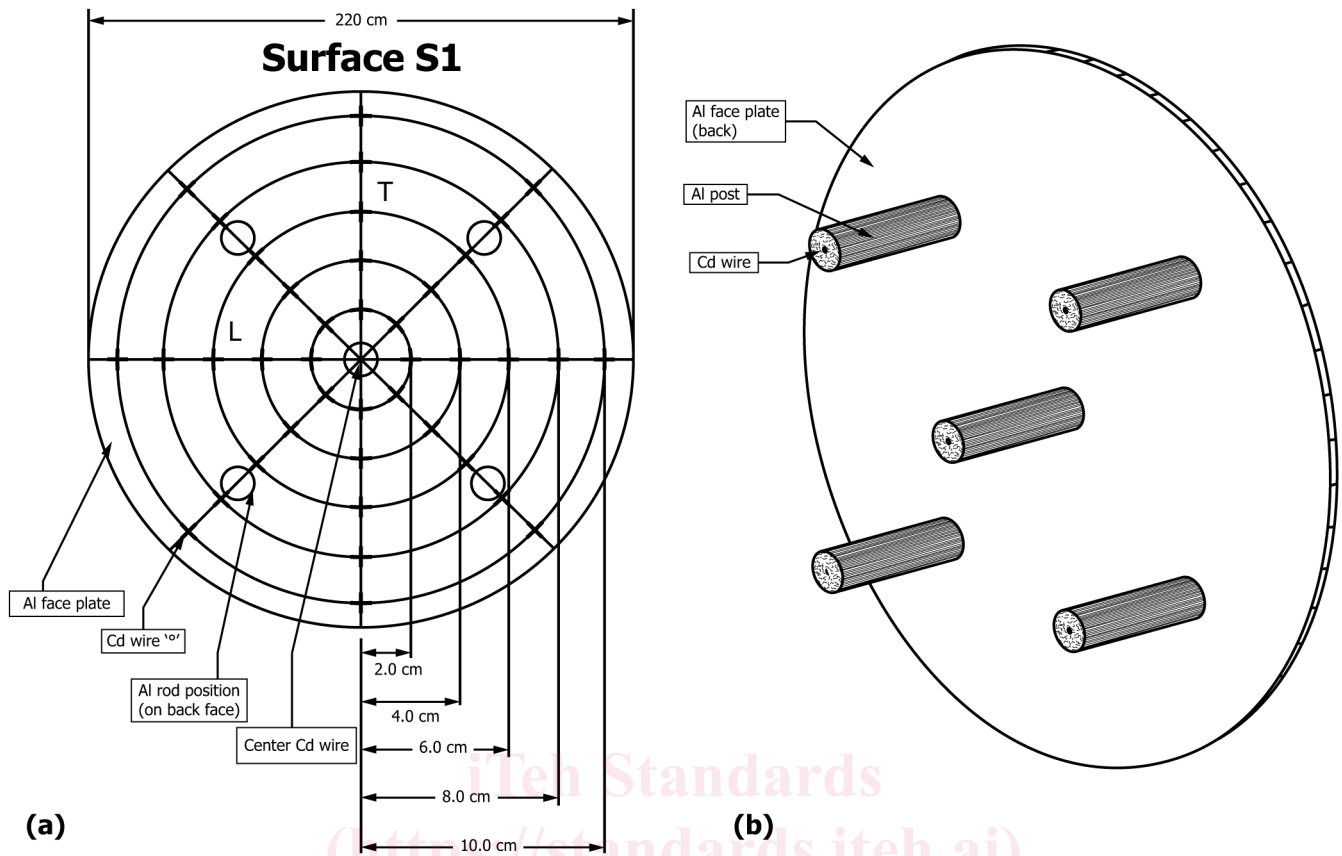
Diagram of the DAI Device Showing the Cadmium Pieces in Solid Black: (a) the S1 surface with machined grooves and dimensions in centimetres, and (b) different orientation illustrates post positions.
